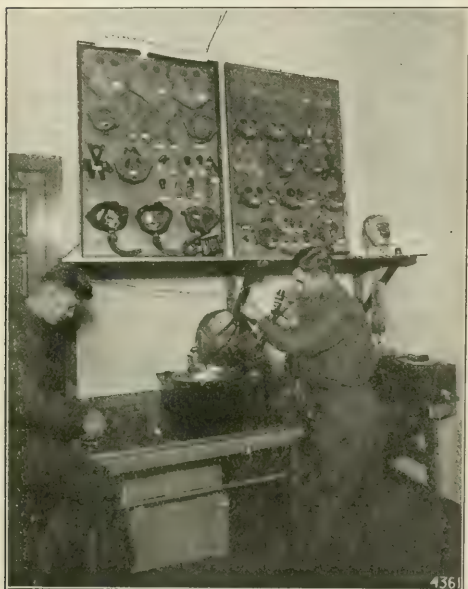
LONG ISLAND LABORATORY. MACHINE DESIGN UNIT SHOWING DEVICE FOR TESTING COMPLETED MASKS FOR LEAKAGE
